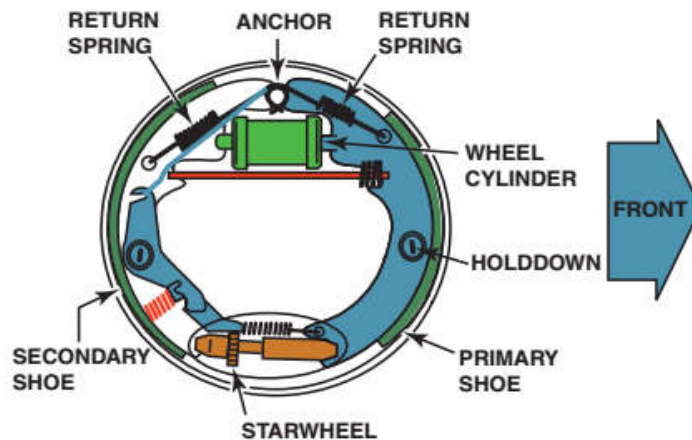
Typical drum brake assembly[ Halderman, 2012]
